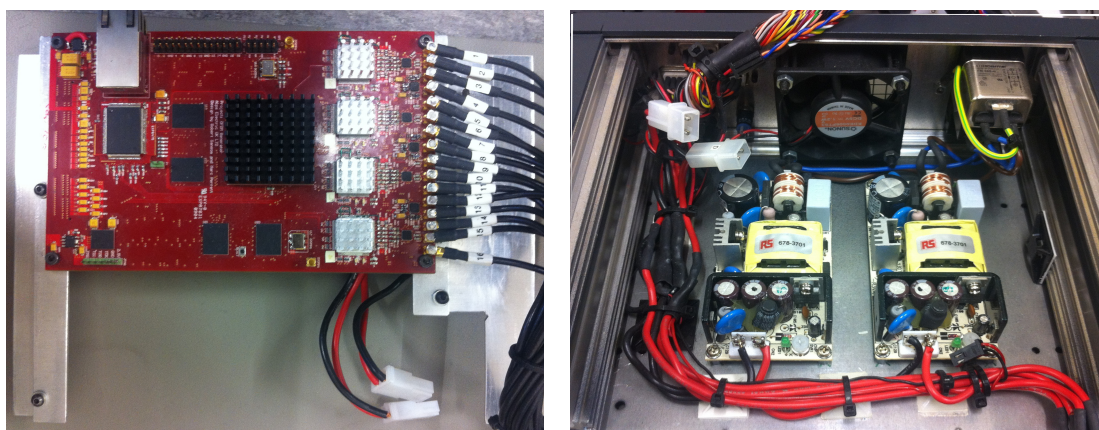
Figure displaying the main and power PCB with mounting plates fitted (right) and the enclosure before the PCBs are inserted (Left)
